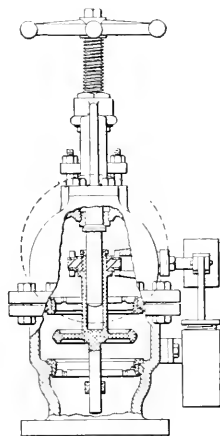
END VIEW OF DOUBLE STOP VALVE
